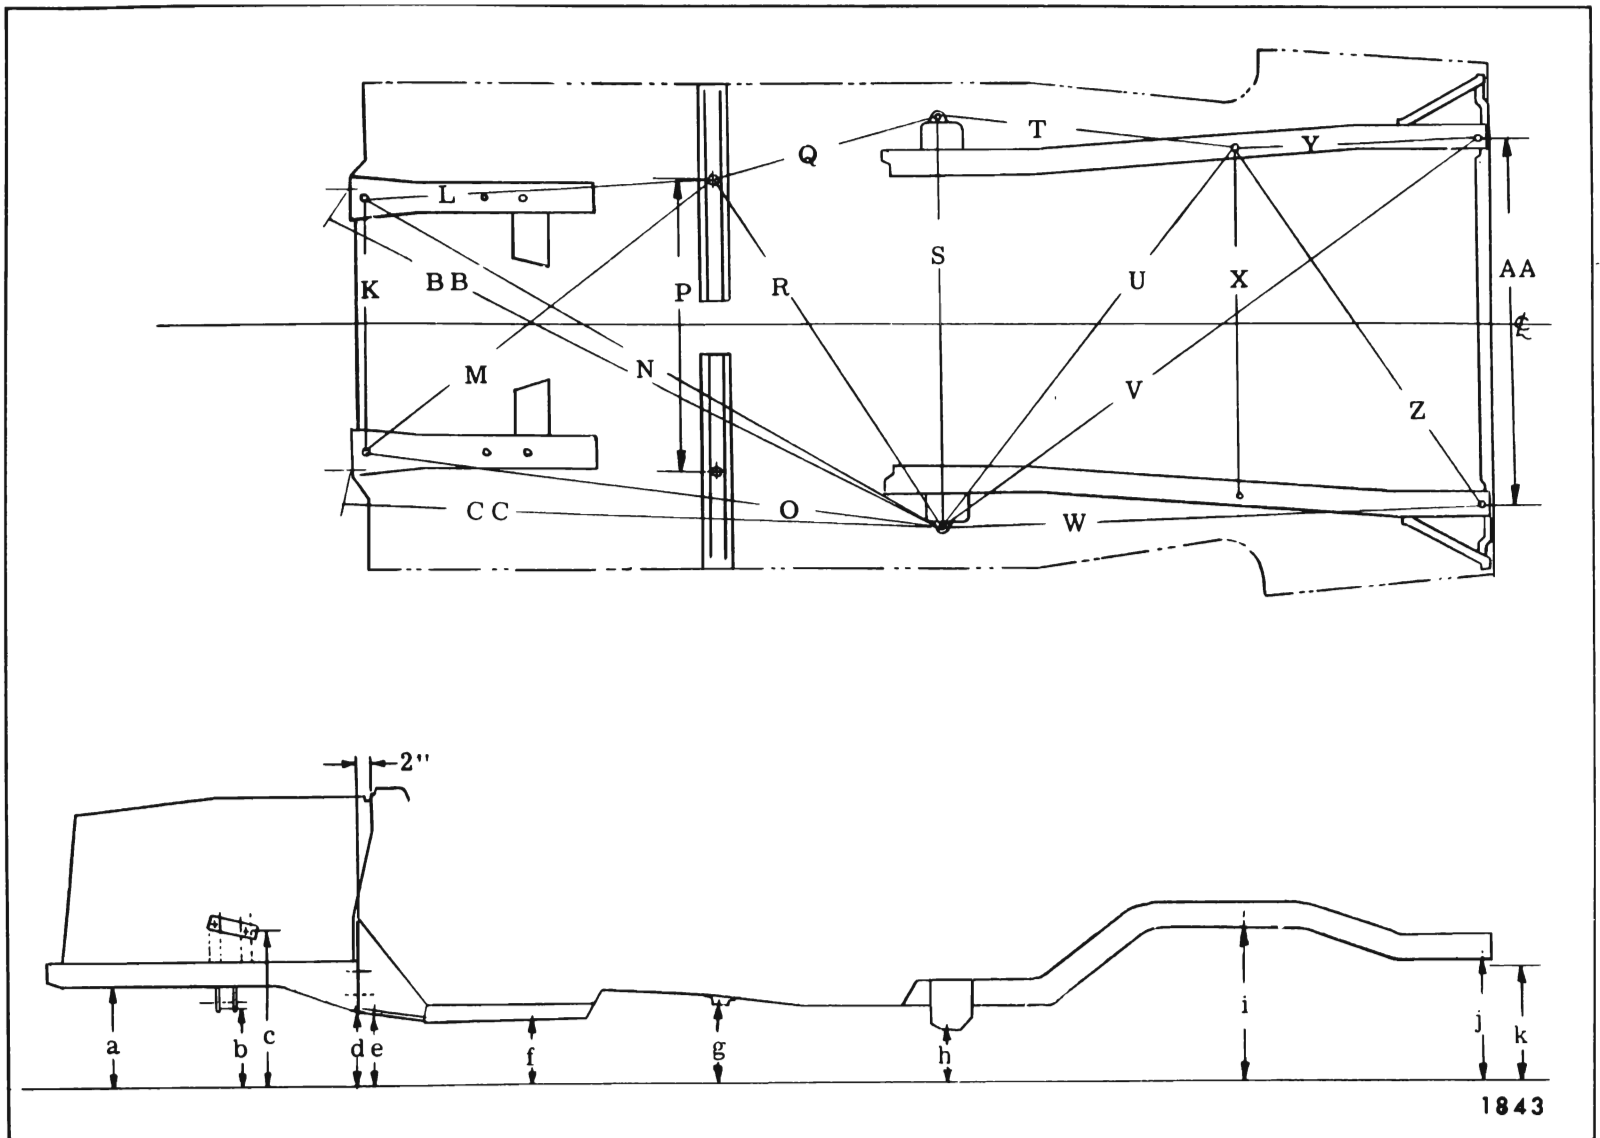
Horizontal and Vertical Dimensions (Body Assembly)
